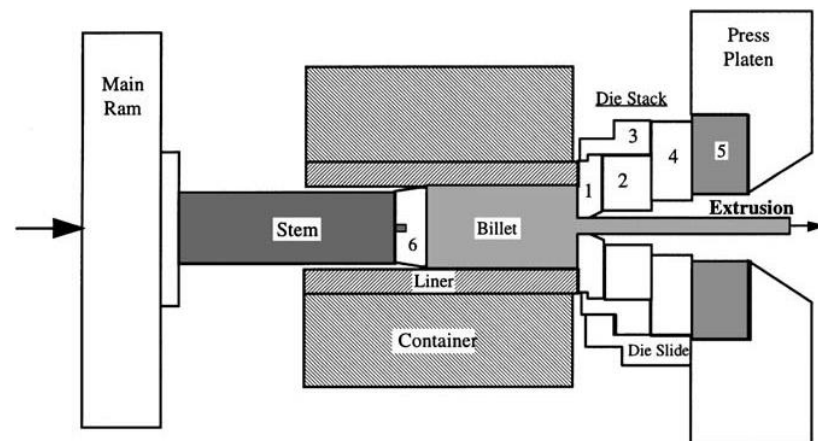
Tooling configuration in direct extrusion processing with a solid die for harder alloy. 1, solid die; 2, backer; 3, die ring; 4, bolster; 5, pressure pad; and 6, floating dummy [18]
